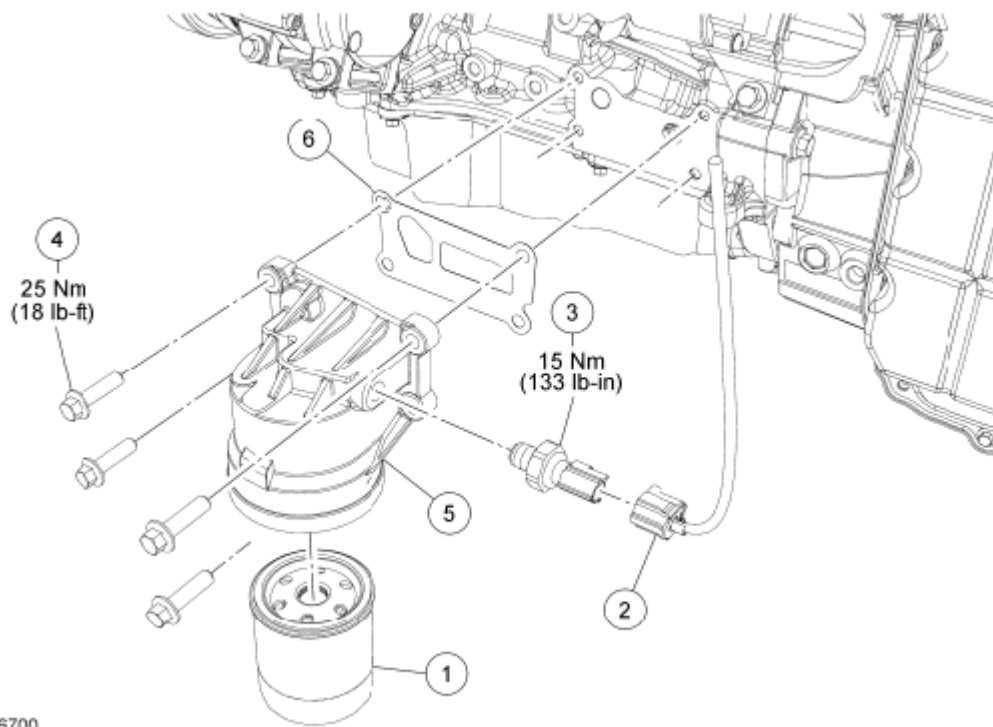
Identifying Oil Filter Adapter, Oil Filter & Engine Oil Pressure Switch With Torque Specifications
